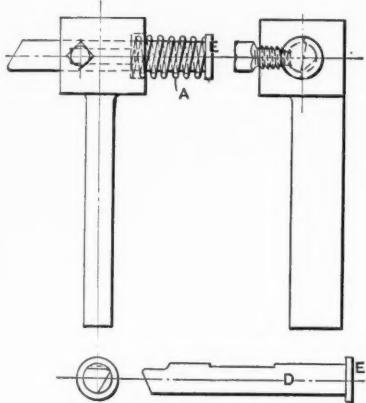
Tool held in Tool-post on Cross-slide in Turret Lathe, for Finishing Casting in Fig. 1.
